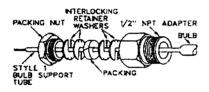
Part Number FTG13A-600R packing nut assembly. (Use with Style 1 bulb with support tube for direct immersion applications.)
